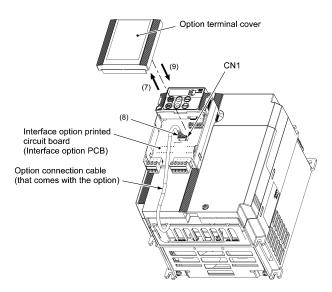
Connecting the Option Connection Cable to the Interface Option PCB
